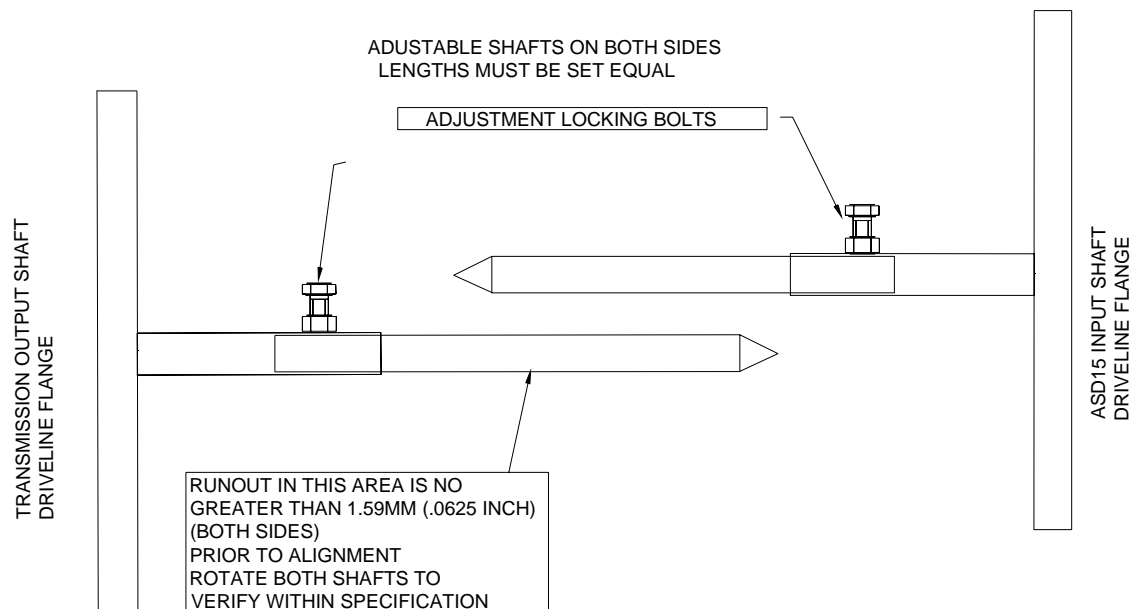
Remote or Island Mounted Alignment Tool, Shafts Parallel
